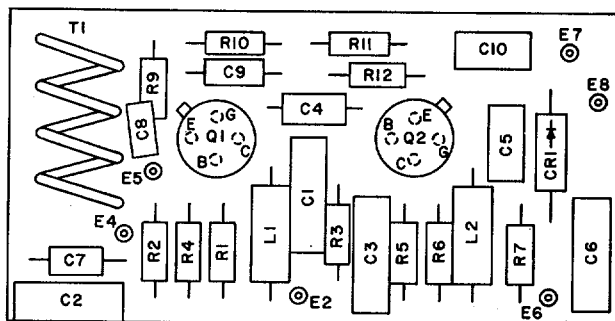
Frequency synthesizer 1A14/2A21, partially disassembled, rear view, parts location.
